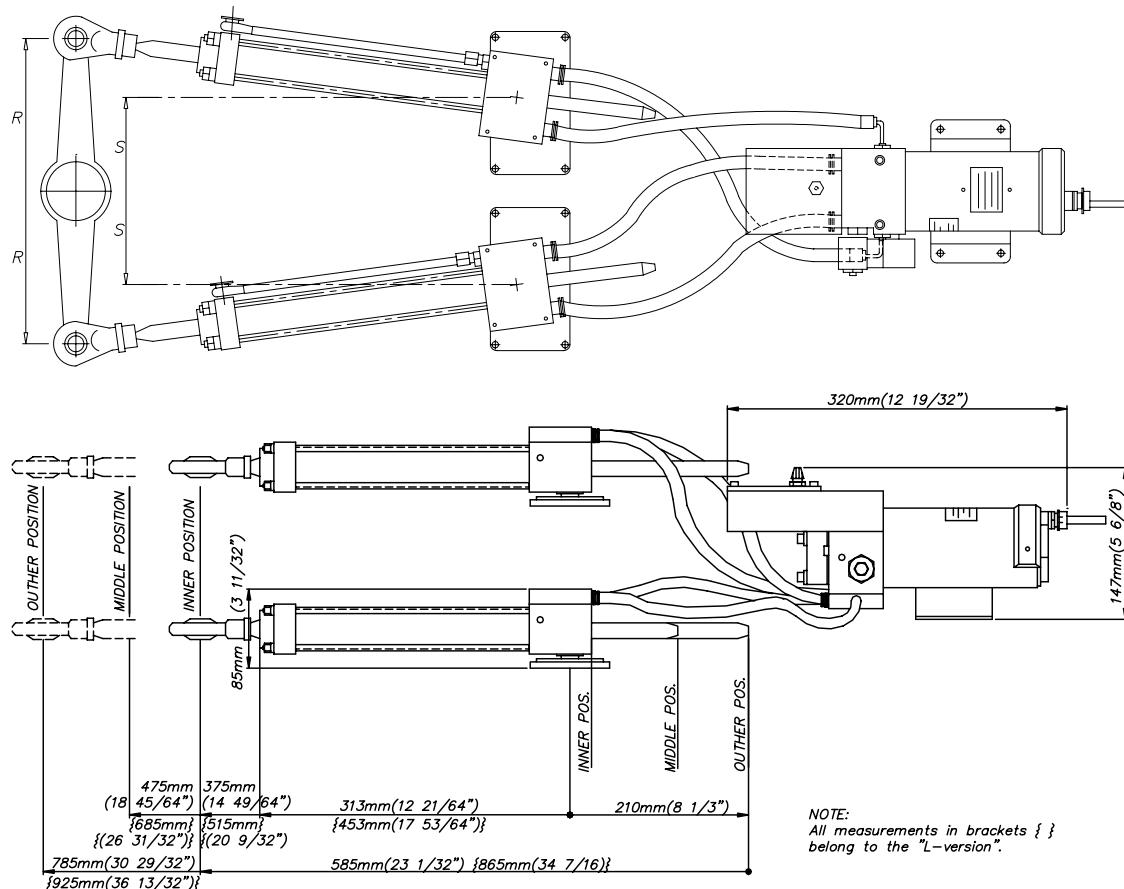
HLD Dual cylinder (Shown with Fracmo type motor)
